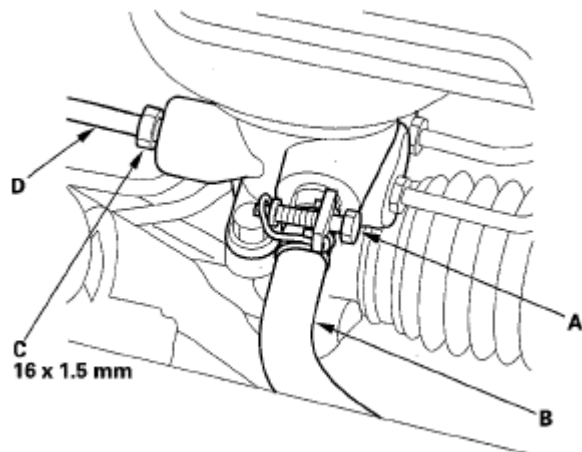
Identifying Return Hose And Adjustable Hose Clamp
